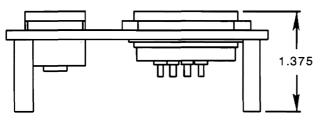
PDE Sensor Panel Assembly (Dimensions in inches)
